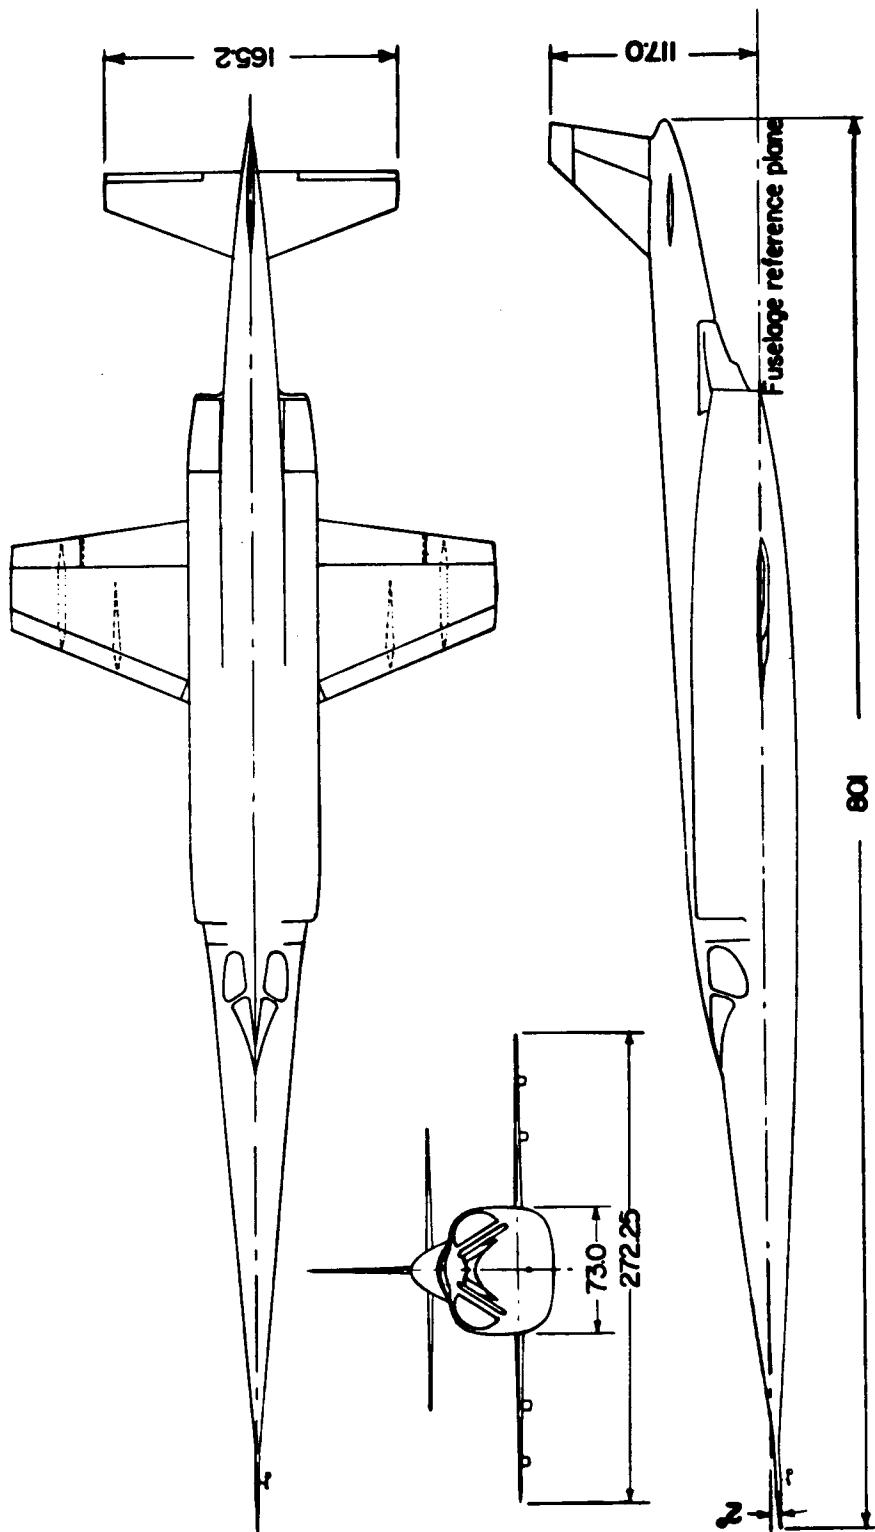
Three-view drawing of the X-3 airplane. All dimensions are in inches.
